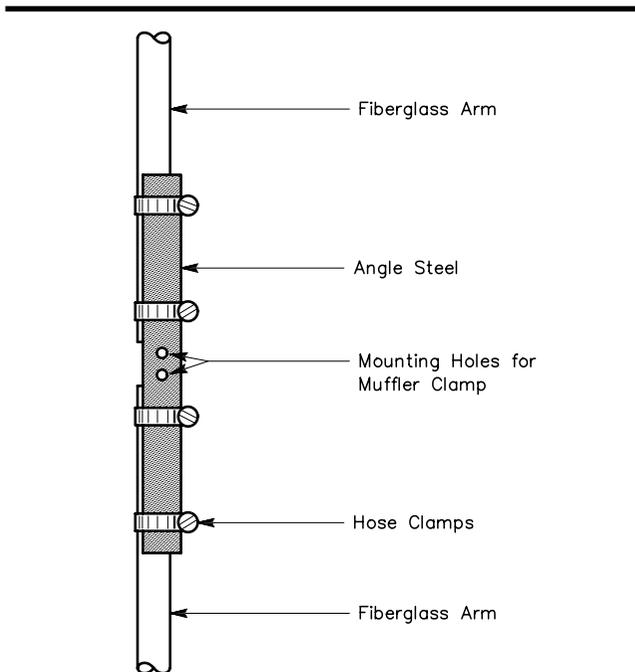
Details of one of two assemblies for a spreader frame. The two assemblies are joined back-to-back to form an X with a muffer clamp mounted at the position shown.
